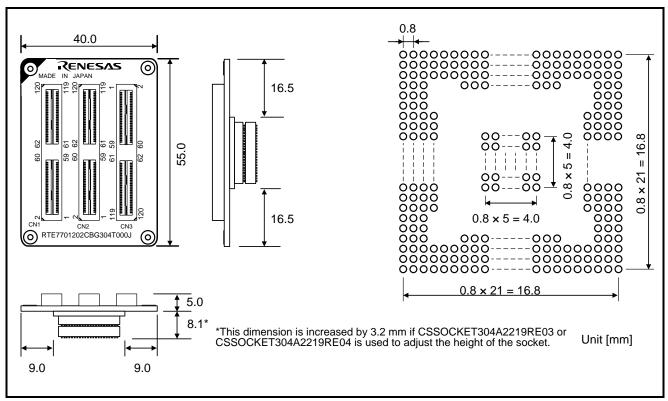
Drawing with Dimensions and a Pad Pattern for Reference
